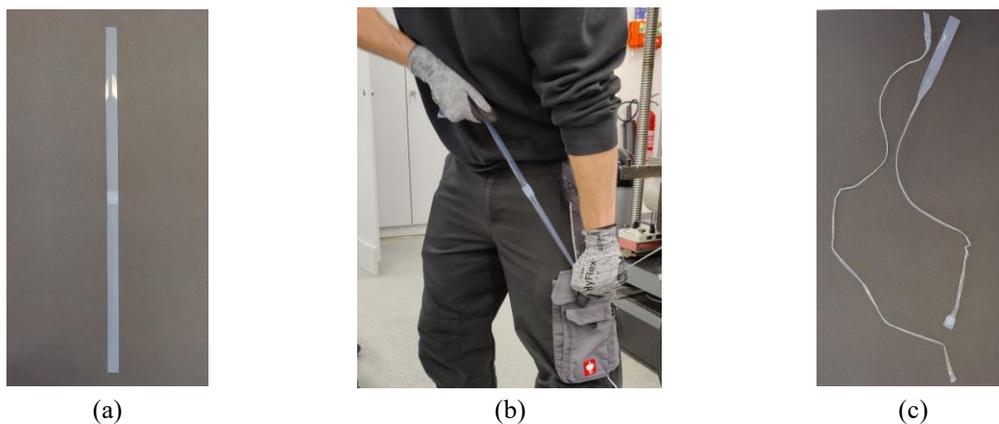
Manual tensile test of an overlap weld; (a) specimen before testing; (b) manual pulling of the specimen, (c) specimen after successful testing
